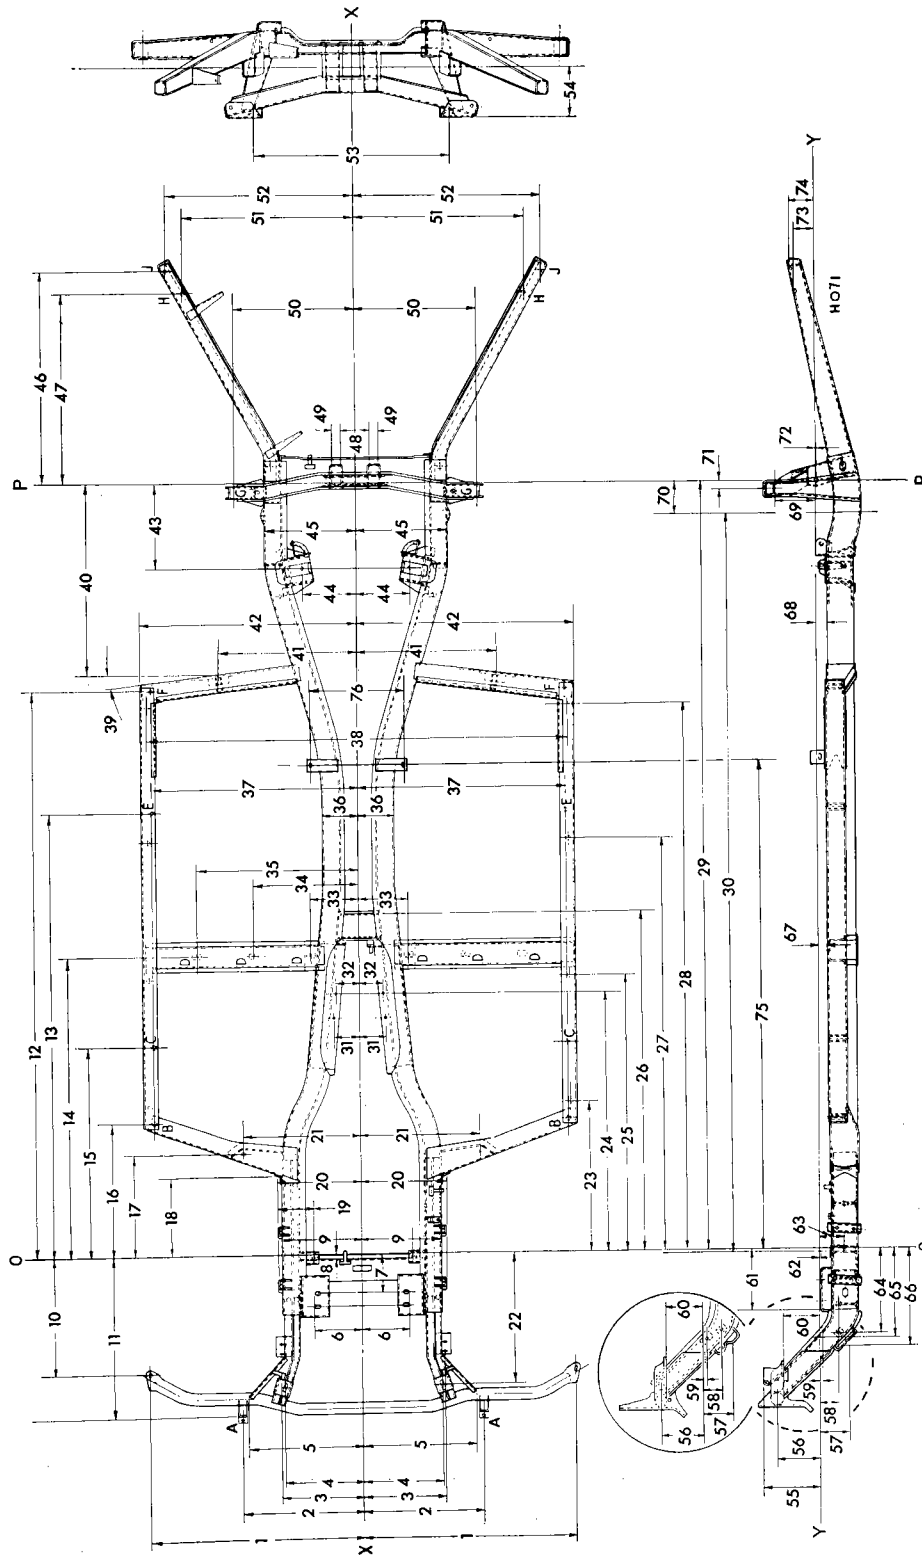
Chassis Frame - Herald 1200, 12/50, 13/60 and Vitesse 6 (Herald 1200 and 12/50 condition shown_inset)
